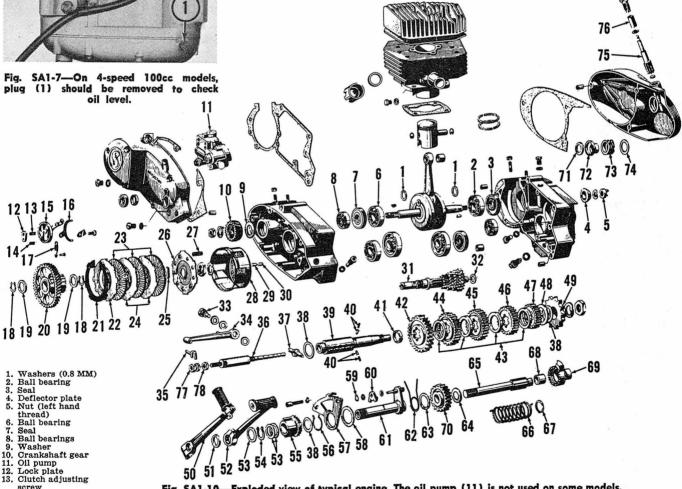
Exploded view of typical engine. The oil pump (11) is not used on some models.
